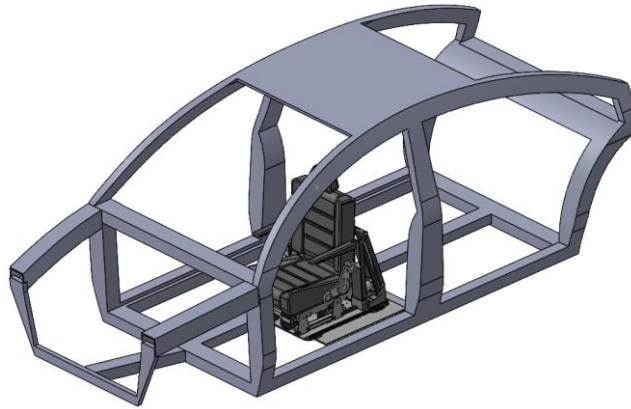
Full Assembly of Integrated Car Swivel Seat with Special Wheelchair
